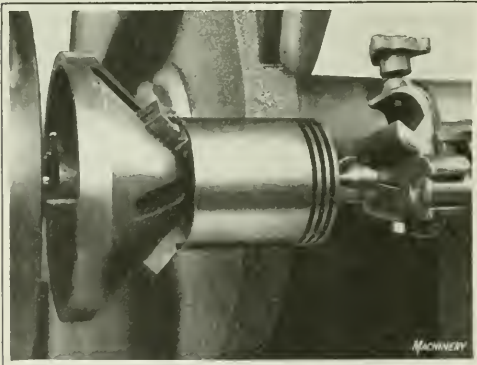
Piston-grinding Attachment developed by the Norton Co.
